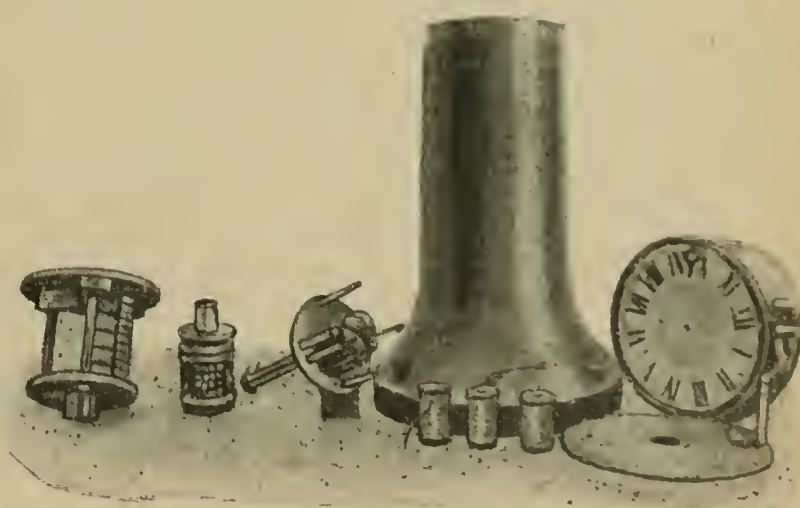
COMPONENT PARTS OF COMBINED RECEIVER AND TRANSMITTER.
